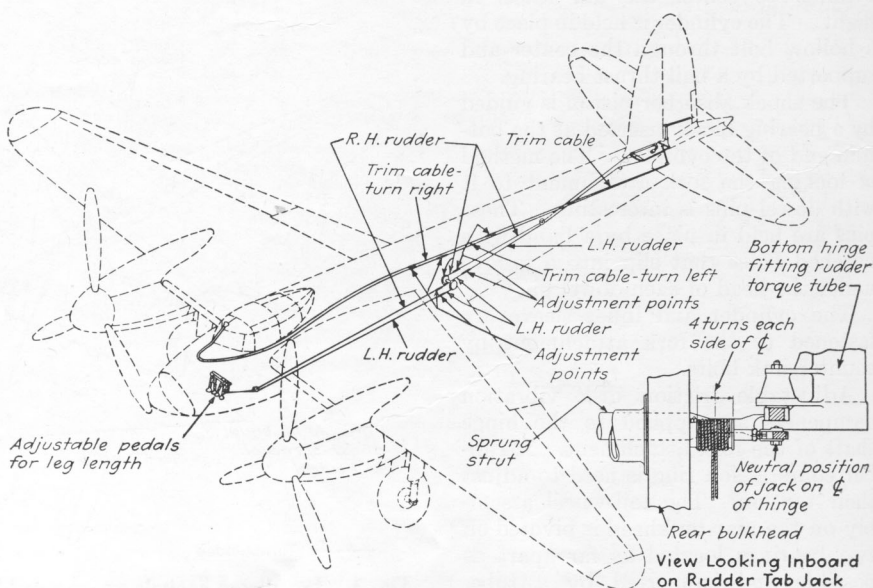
Rudder control cables with adjusting turnbuckles indicated.
